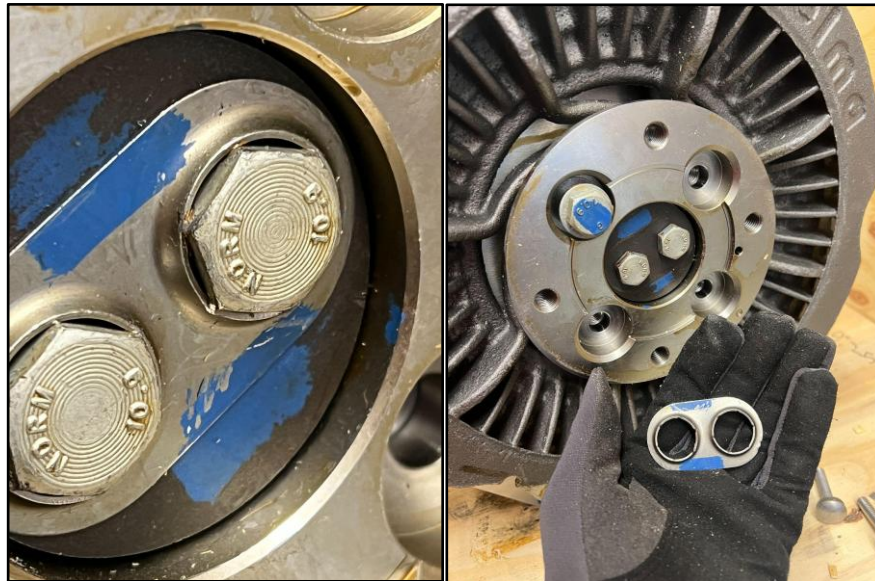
Lock Tab (left) and Lock tab off the end shaft plate (Right)
